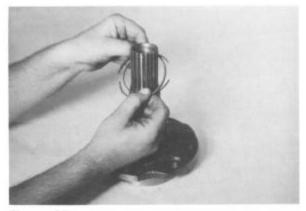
Remove support oil sealing ring and sealing ring expander spring.
